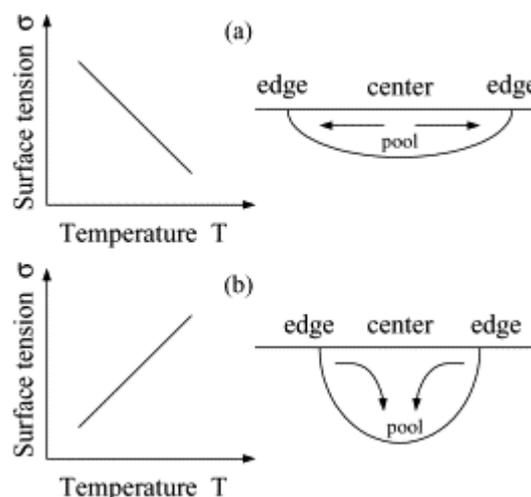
Schematic of Marangoni convection mode in weld pool.
